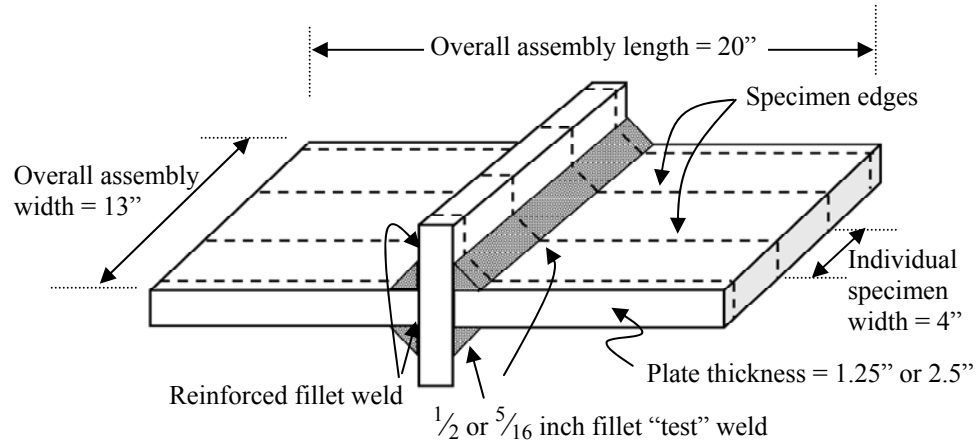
Cruciform specimen assembly showing key dimensions and fabrication details
